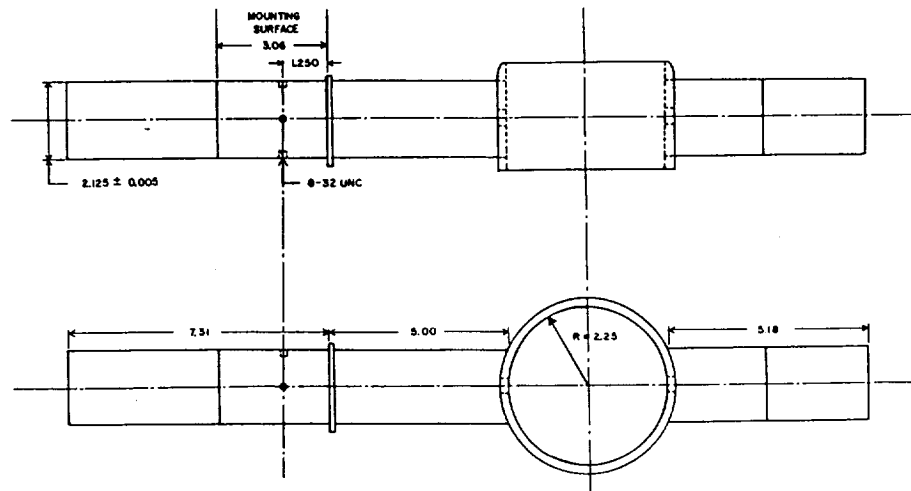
Probe of PVM-100A. Top view (upper), front view (lower). Dimensions in inches.
